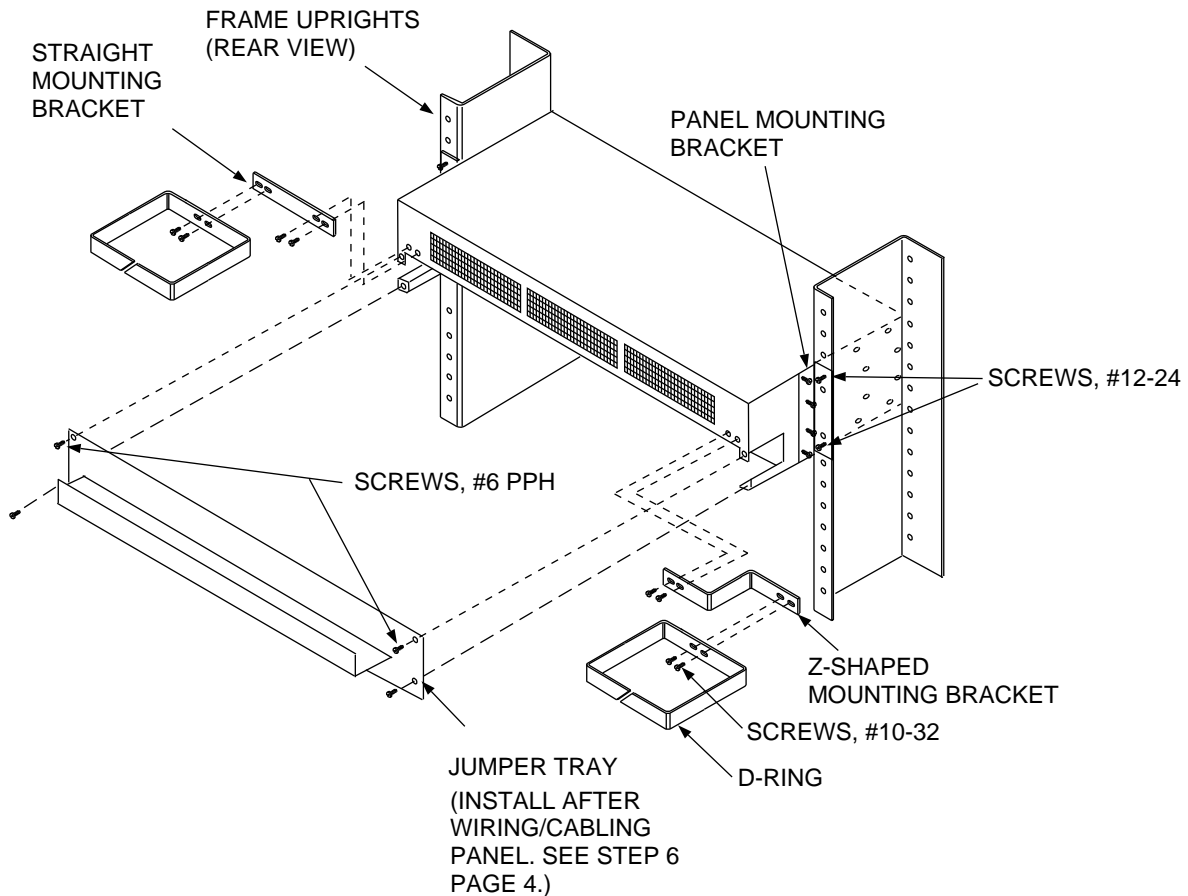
56- and 60-Circuit Rear/Rear Hardwired Bantam Panel to Rear of Frame
